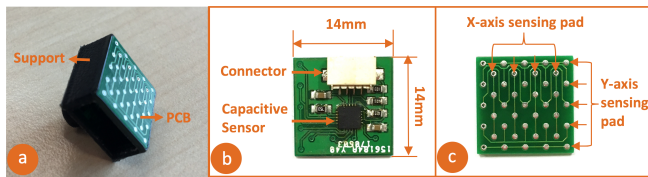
Structure of a single GestAKey keycap: (a) Each keycap consists of two parts: 3D-printed support and PCB. (b) Bottom layer: capacitive sensing IC and connector; (c) Top layer: sensing pad matrix.
